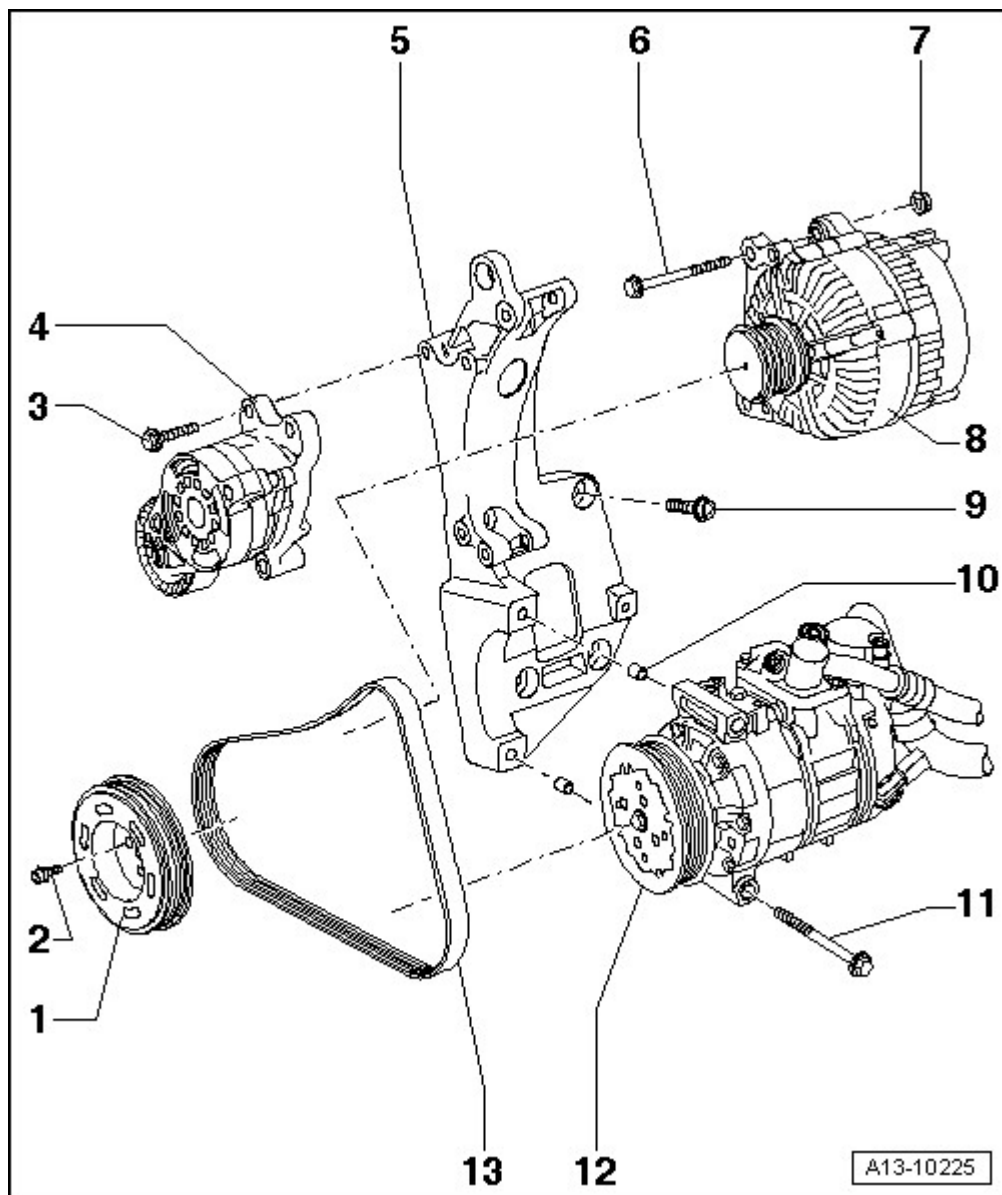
Ribbed Belt And Assembly Bracket Overview
